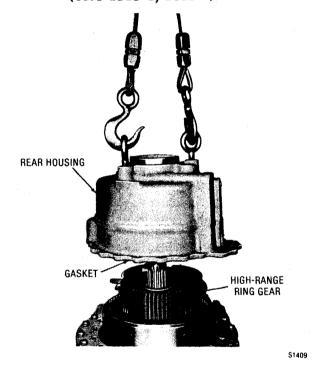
Removing transmission rear housing assembly (TRT 2221-1, 2421-1)
